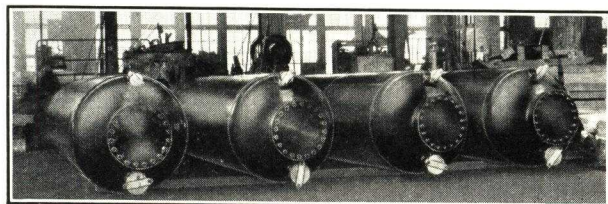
Set of Steel Autoclaves—All-welded Construction
